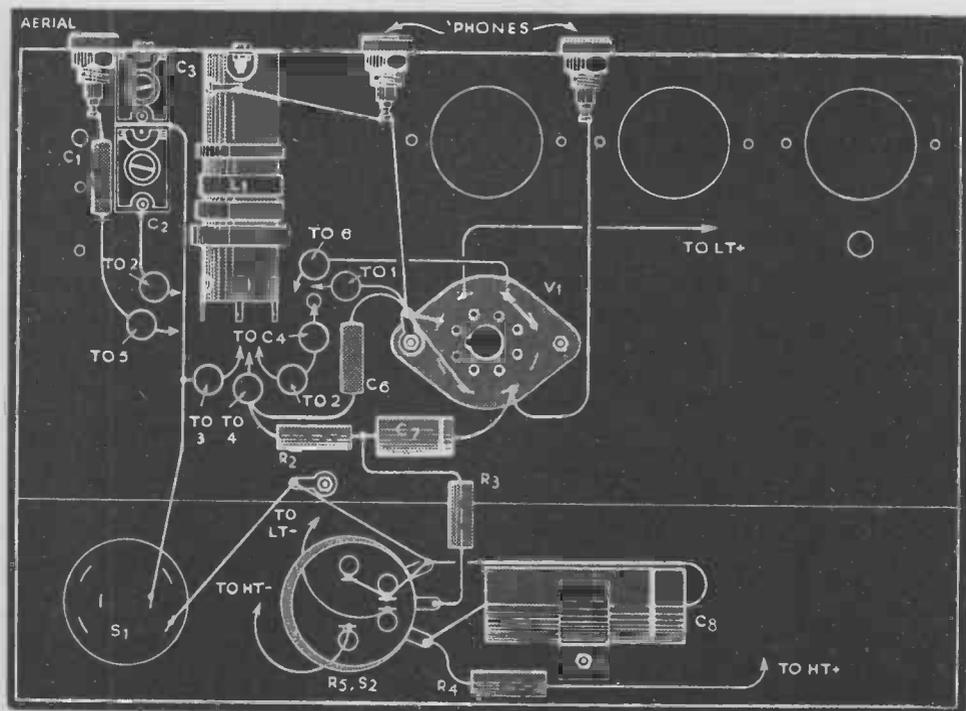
UNDER-CHASSIS VIEW OF THE ONE-VALVE RECEIVER
